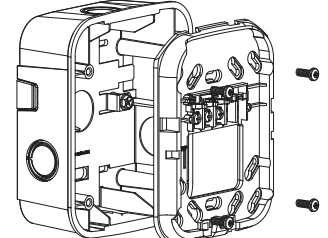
ATTACH MOUNTING PLATE TO BACK BOX
